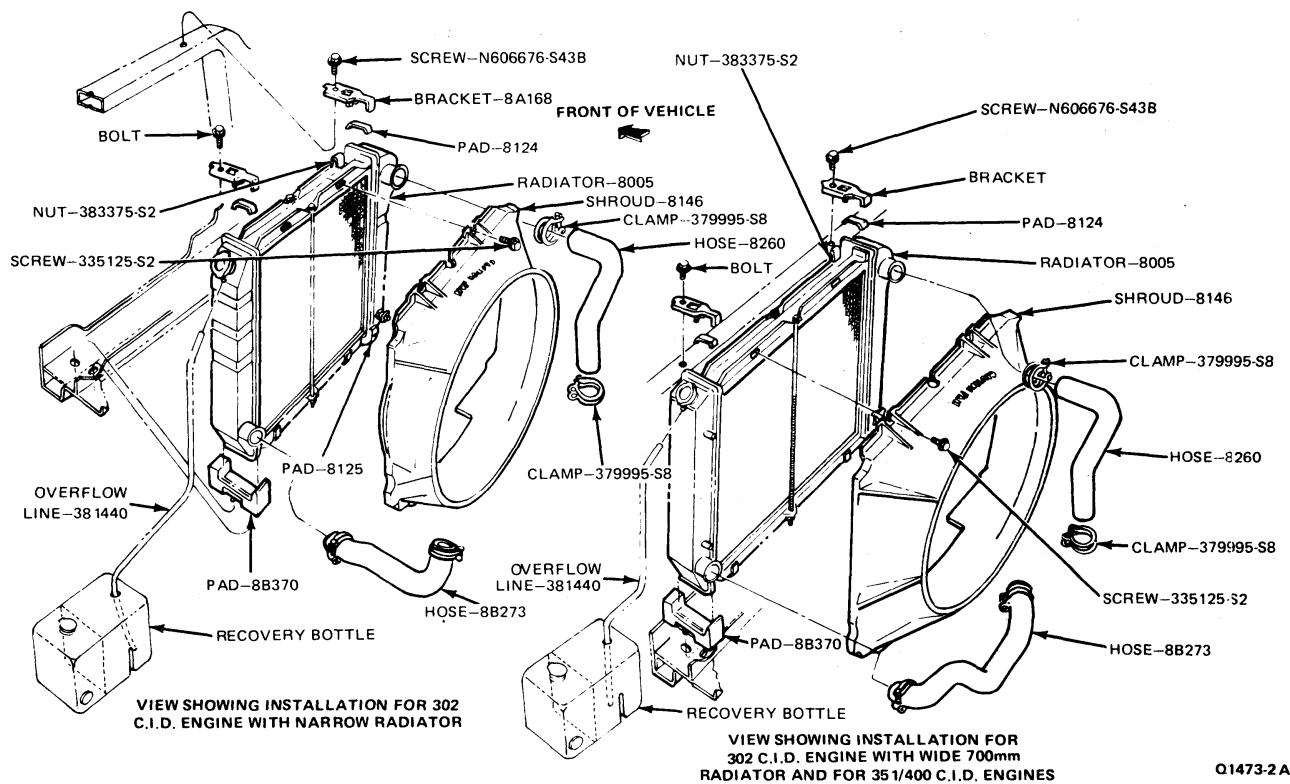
Radiator Installation—Bronco and F-100—F-350—8 Cylinder Engine
